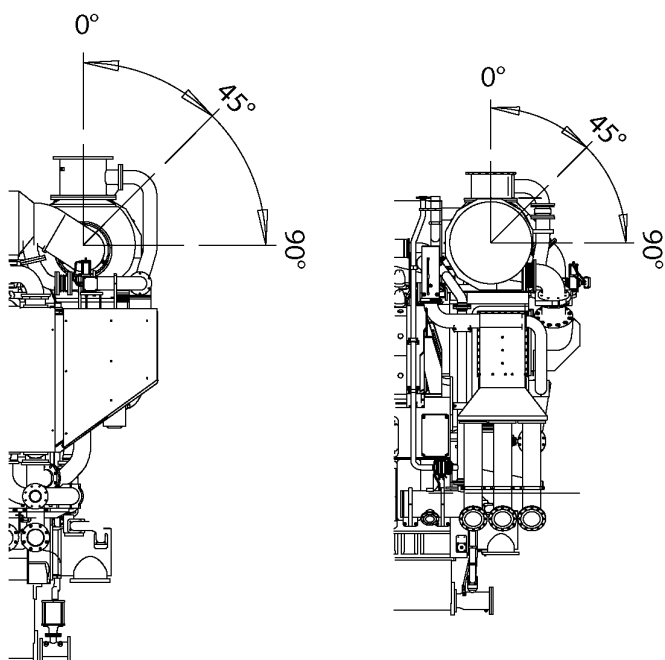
Exhaust pipe connection, (4V58F0057d, -58d)
